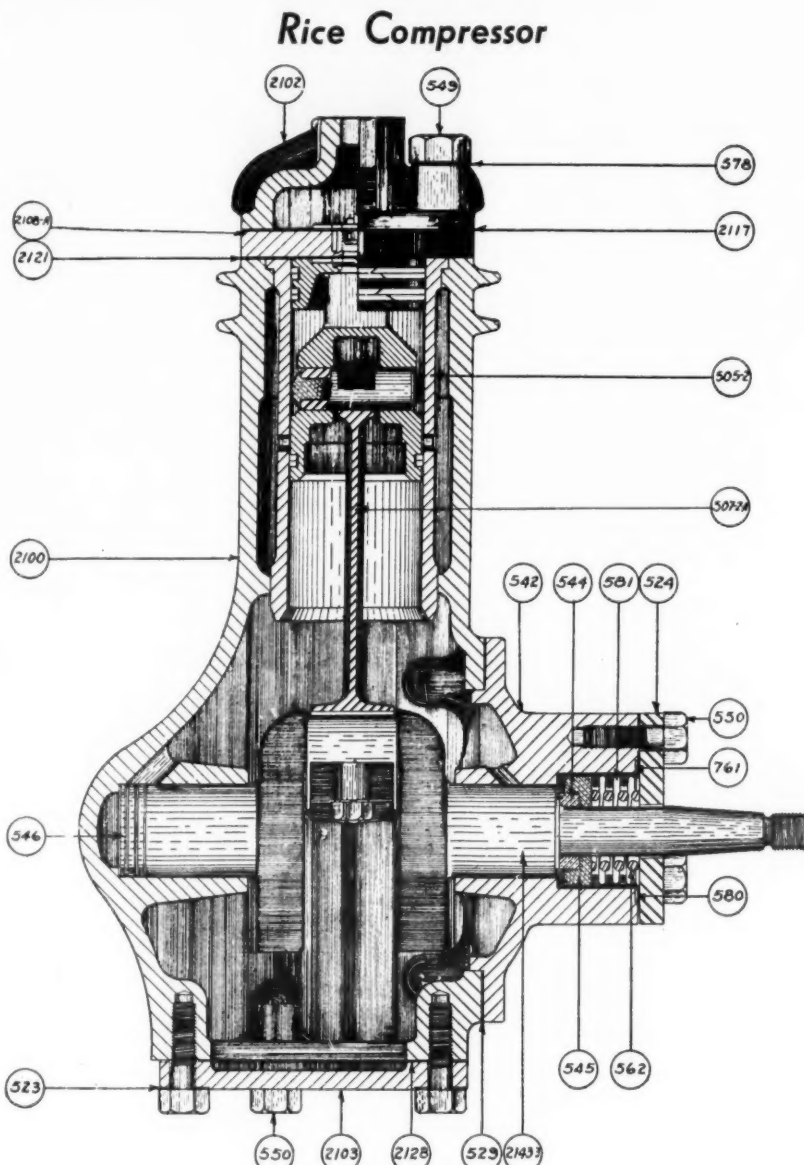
Section of the Rice compressor. Key to the numbered parts will be found in columns one and two.
